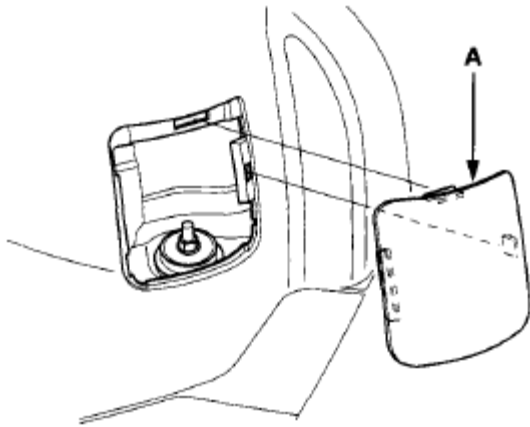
Identifying Access Panel On Cargo Area Side Trim - Left Side
